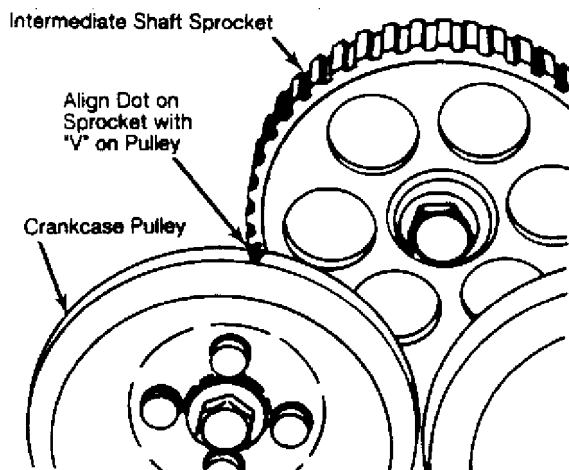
Aligning Intermediate Shaft & Crankshaft
